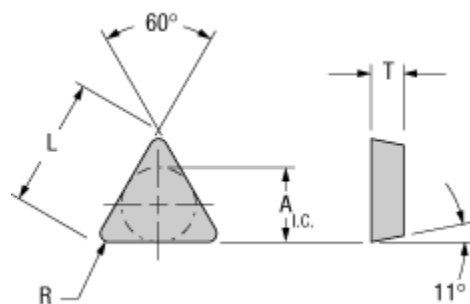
Tool geometry. A : 0.375 in., L : 0.650 in., T : 0.125 in., R : 0.031 in. (adapted from [60]).
